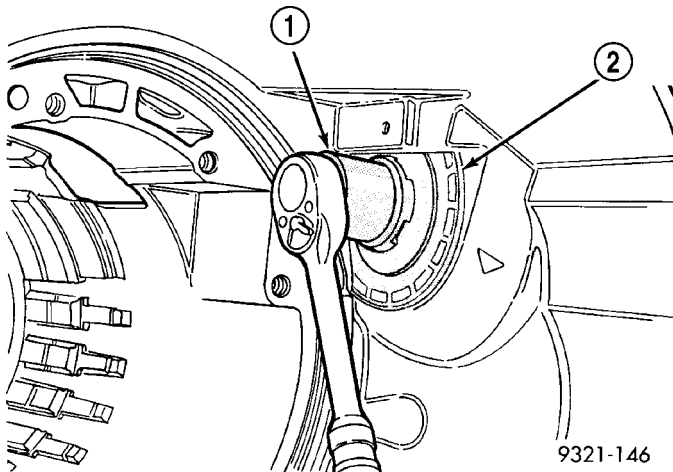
Remove Inner Adjuster By Turning Clockwise
